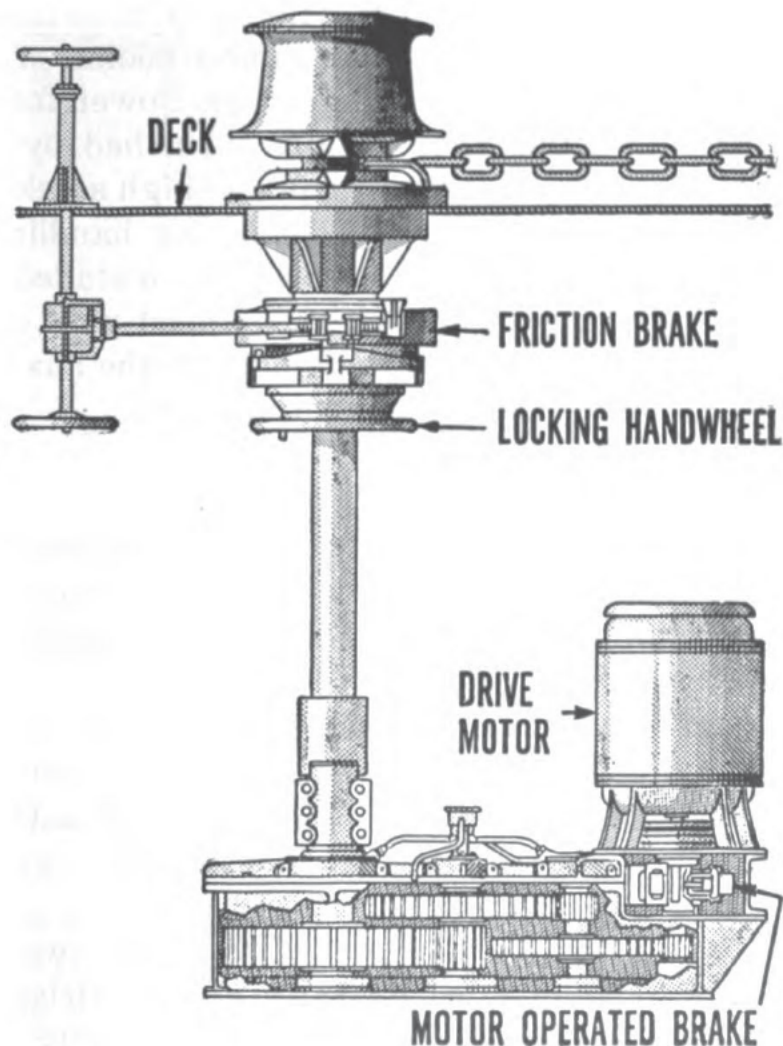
Typical electrohydraulic anchor windlass arrangement.
